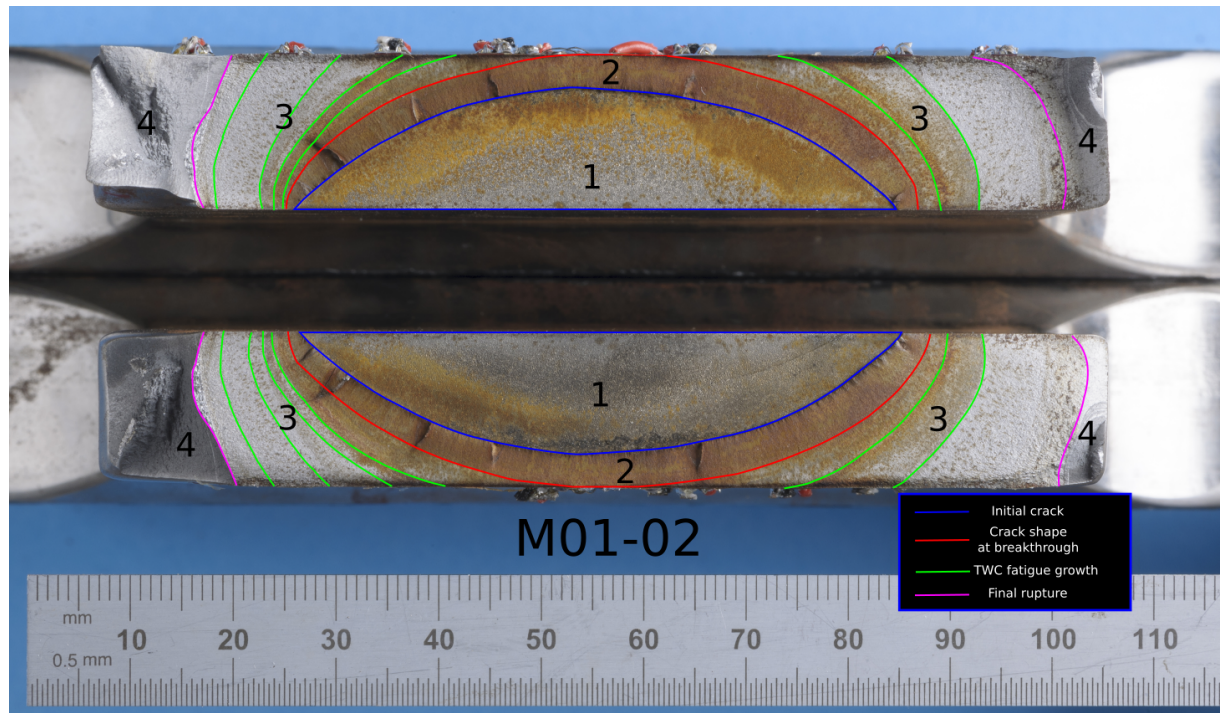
Test on high strength steel plate - Fracture surface - Sample M01-02
